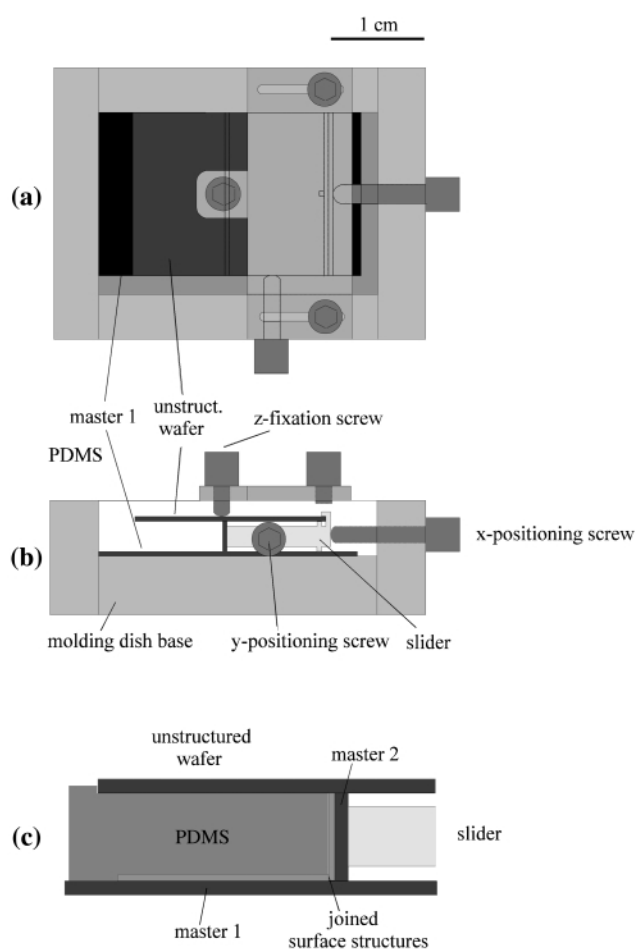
Dish for molding from multiple joined master chips. Arrangement as for fabrication of building blocks 1 or 2. Joining operation is described in the text. (a) Top view of the molding dish base. (b) Side view of the molding dish base. (c) Enlargement of the master arrangement after joining of the surface structures.
